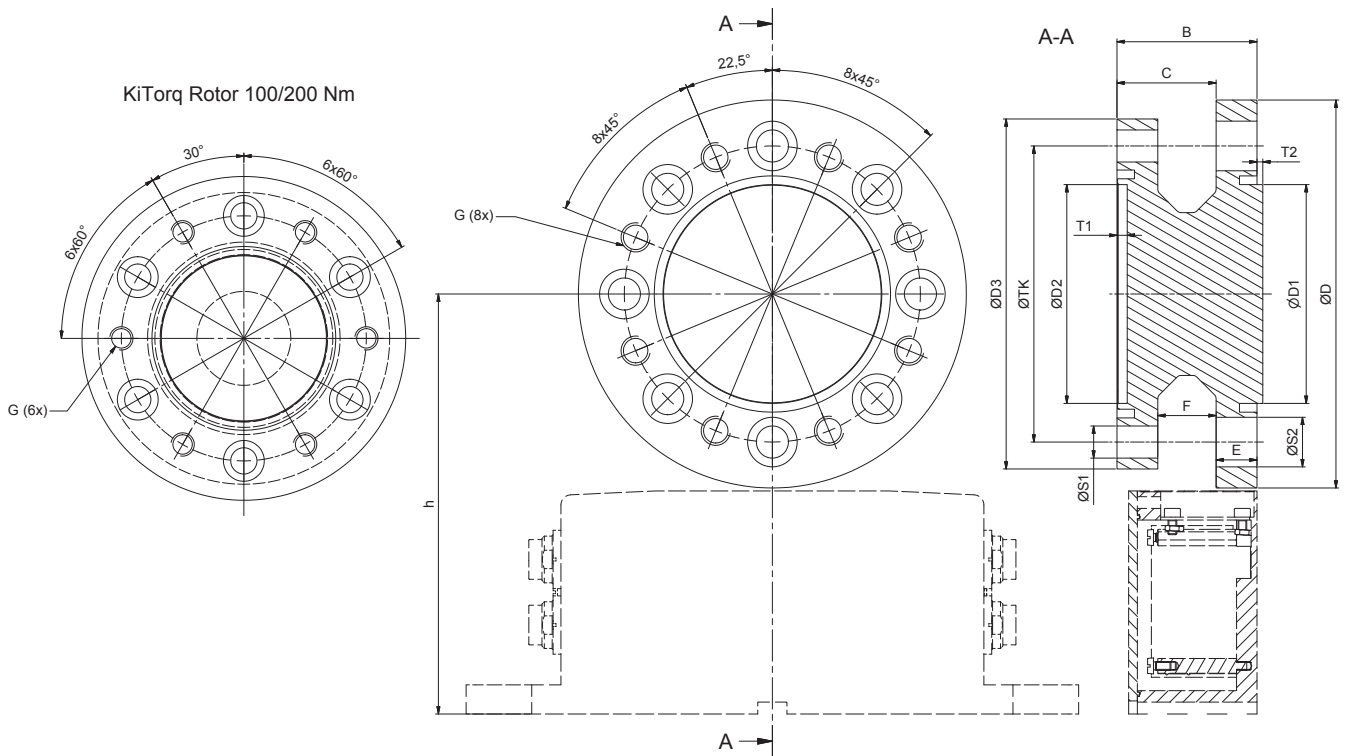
Dimensional drawing of Type 4550A... KiTorq Rotor torque measuring unit
